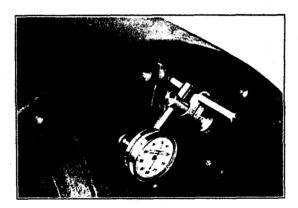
Backlash Indicator 91220 Attached to Rear Axle Housing
